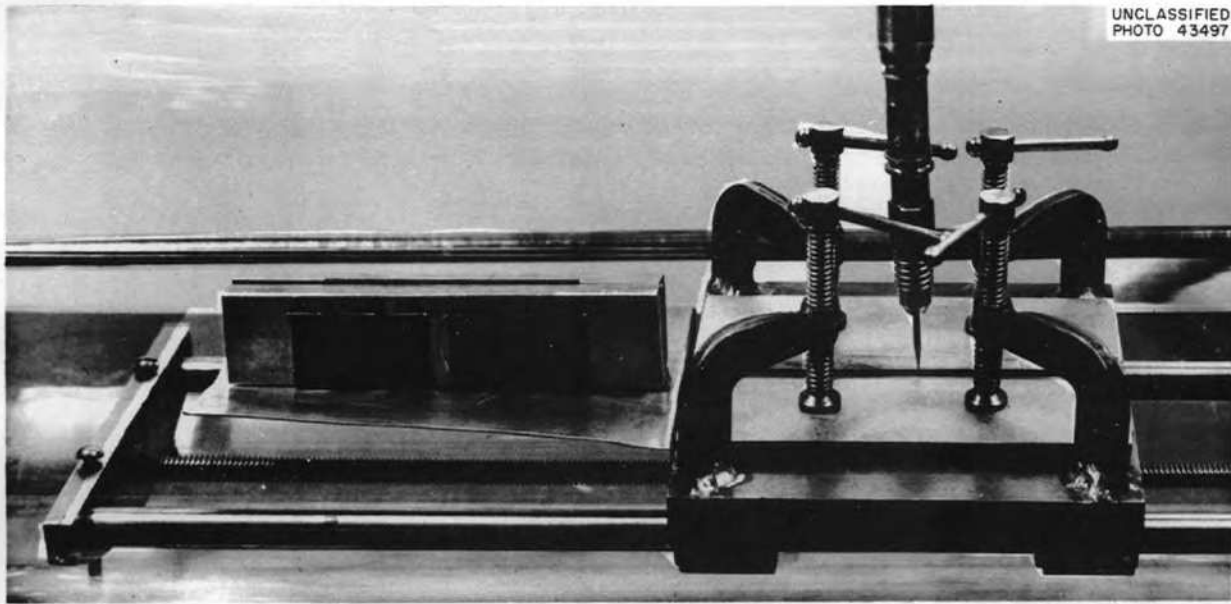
Close-Up of Dry Box Equipment Showing Setup for Preparing Edge-Fusion and Butt Joints.
